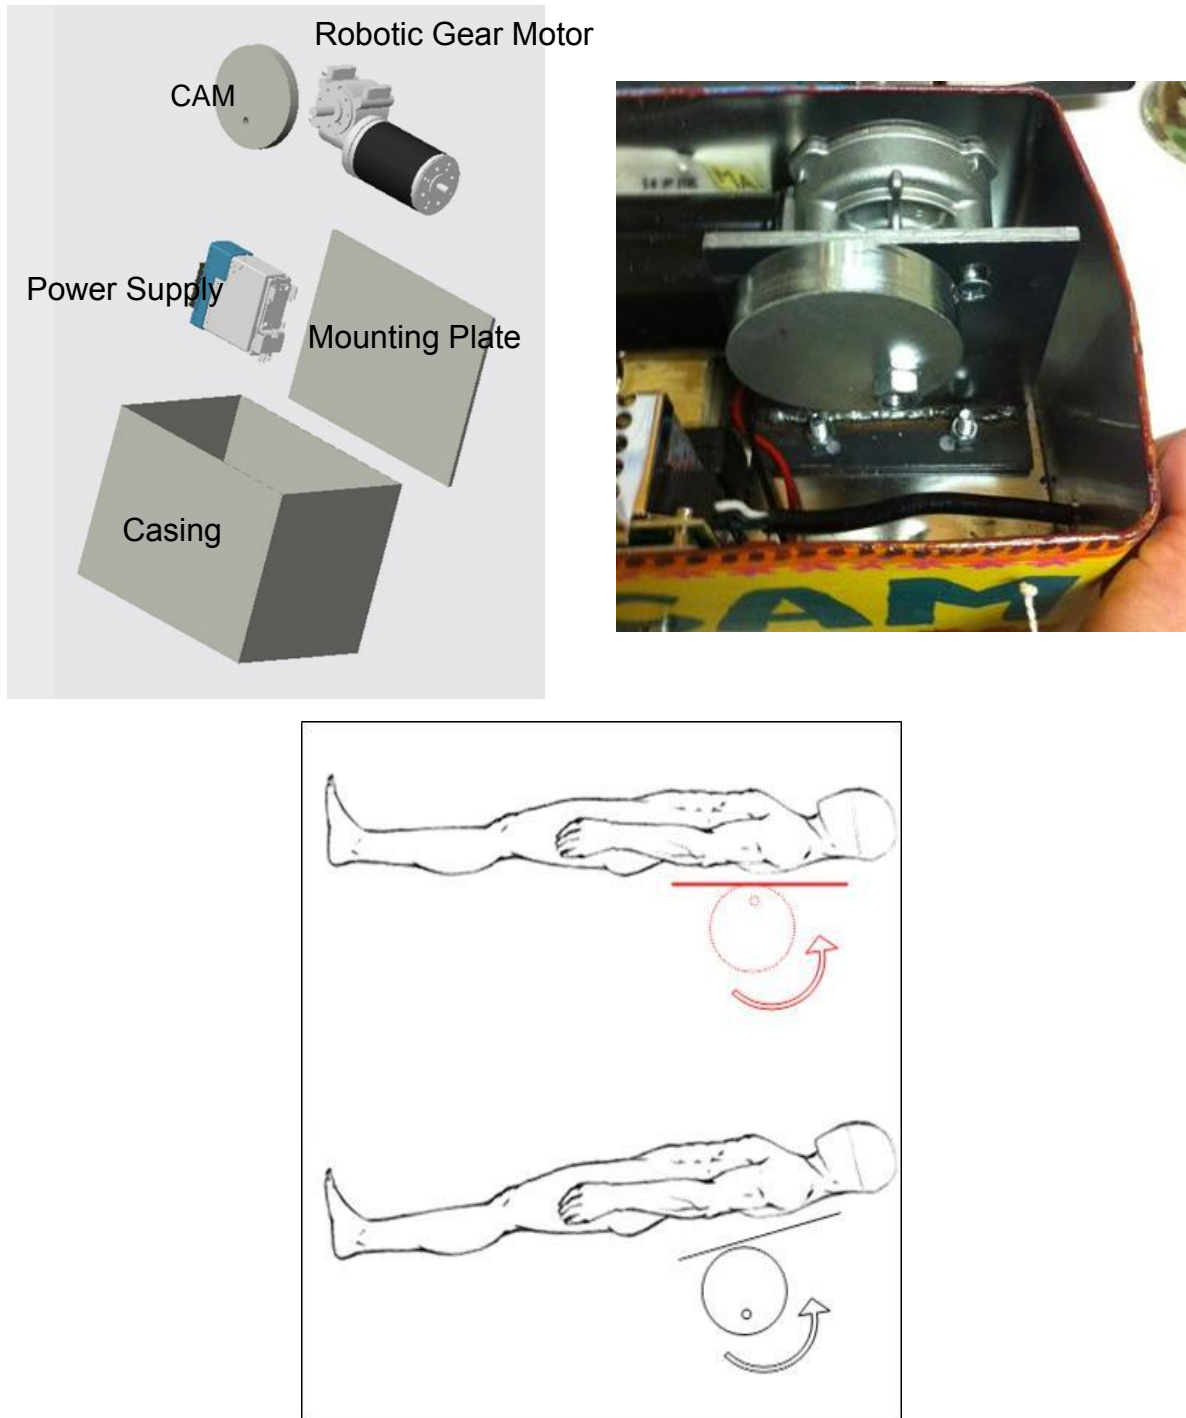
(Top Left) Exploded CAD drawing of device components; (Top Right) View inside completed device showing motor and offset CAM lobe; (Bottom) Illustration of how the system induces upward motion of the manikin for seizure simulations.
